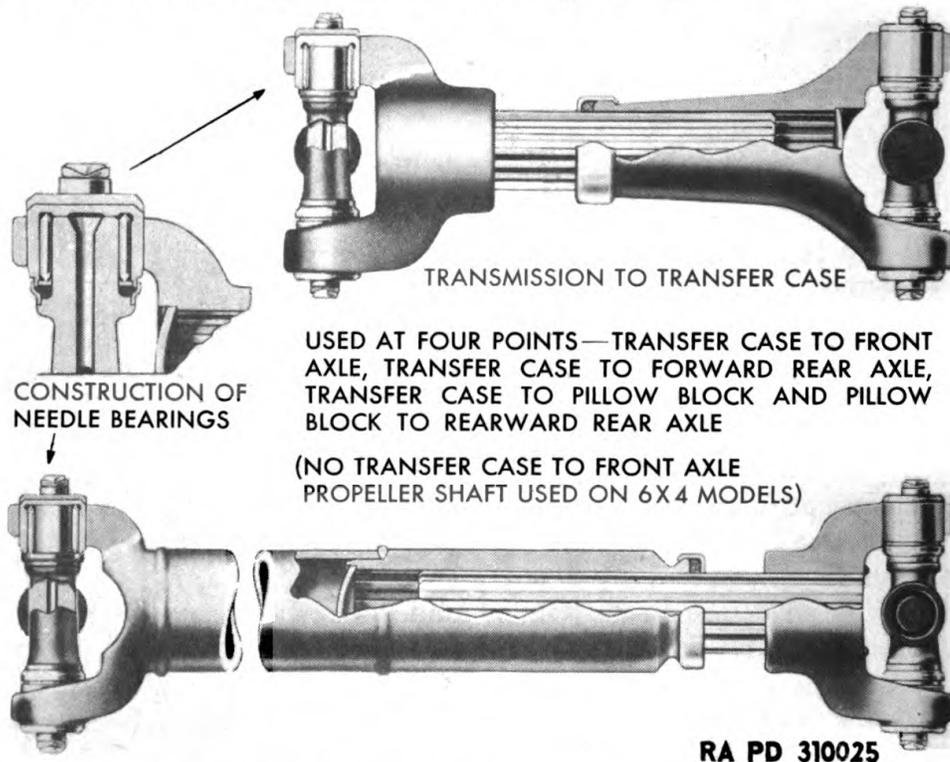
Cleveland-type Propeller Shafts and Universal Joints
